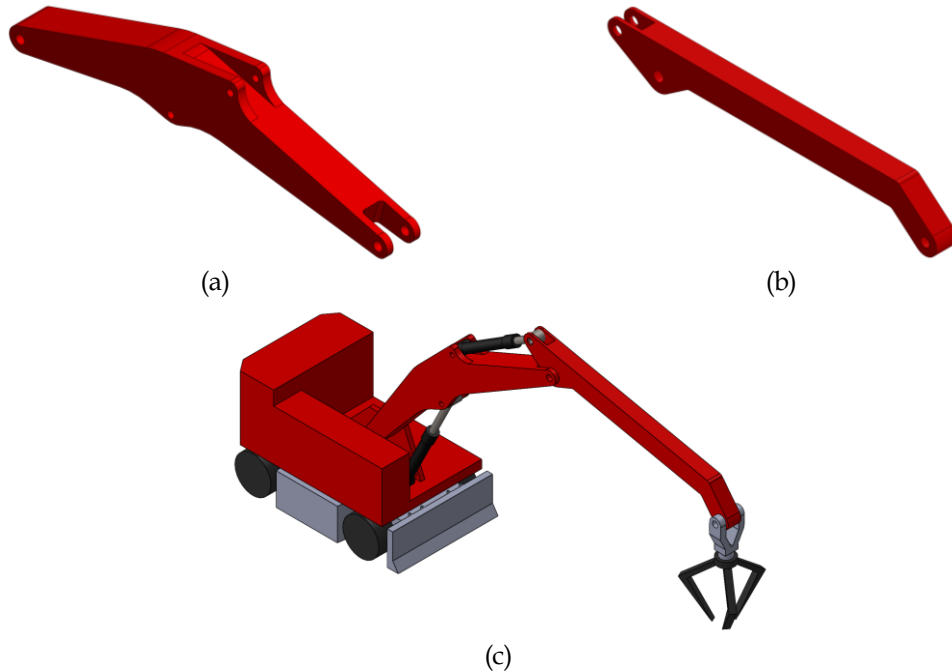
Simplified CAD of the Minelli M15: boom (a), stick (b), assembly (c).
